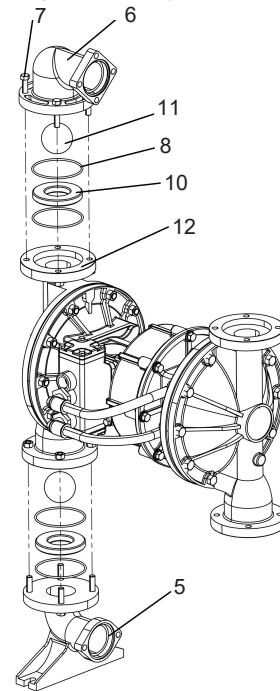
Disassembly of Check Valve(Ball & Seat)
